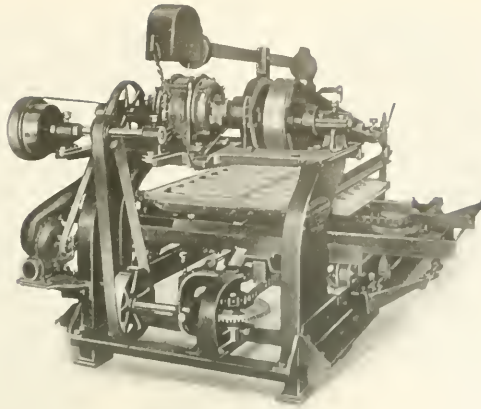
End View of Machine showing Arrangement of Drive to Feed Mechanism and Exhaust Fan
